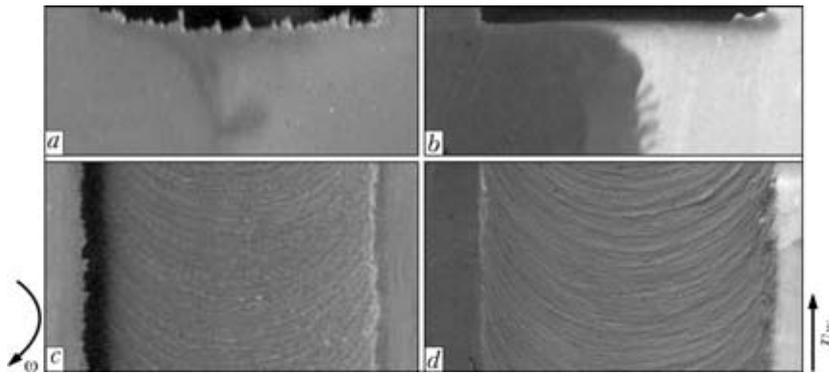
Appearance of cross-sections (*a, b*) and face surfaces (*c, d*) of welds produced by FSW using a tool with a tip having smooth side surface (*a, c*) and thread (*b, d*)
